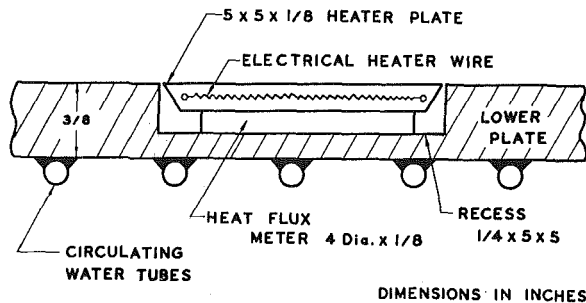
Sectional view of lower plate showing assembly of heater plate and heat flux meter in the recess. (Note: drawing not to scale.)
